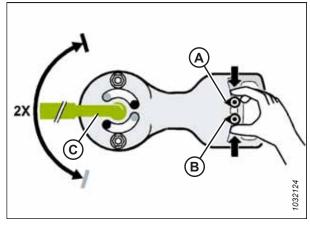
Wing Balance Adjustment – Left Side Shown
